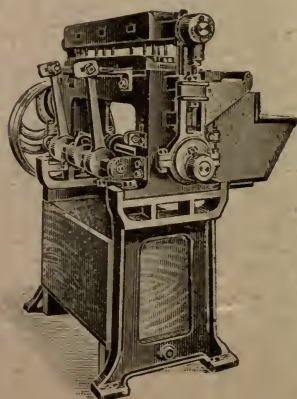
Semi-automatic peg and lace hole punching machine.
